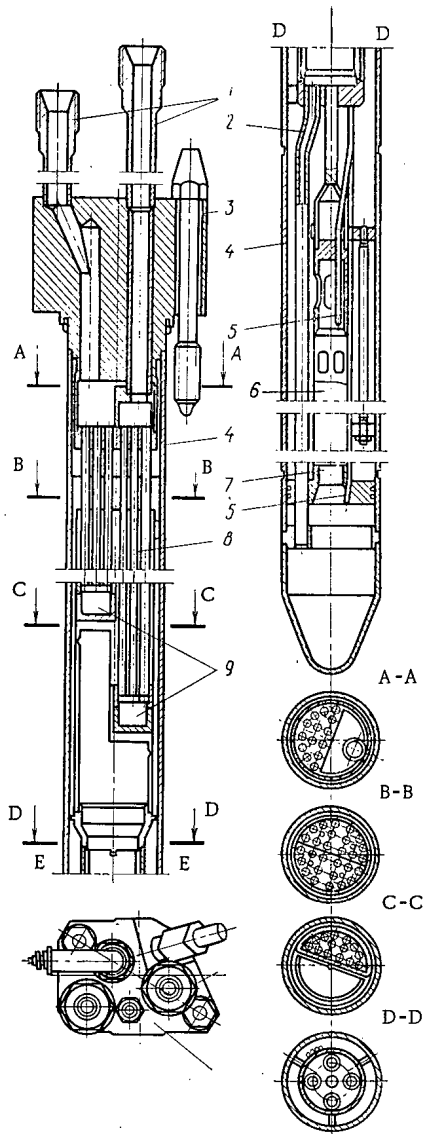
Design of channel loop: 1) pipe outlets for coolant water; 2) lowering tube; 3) channel head; 4) outer casing; 5) thermocouple; 6) fuel assembly to be tested; 7) lifting tube; 8) built-in tube-and-shell heat exchanger; 9) floating heads of heat exchanger.
